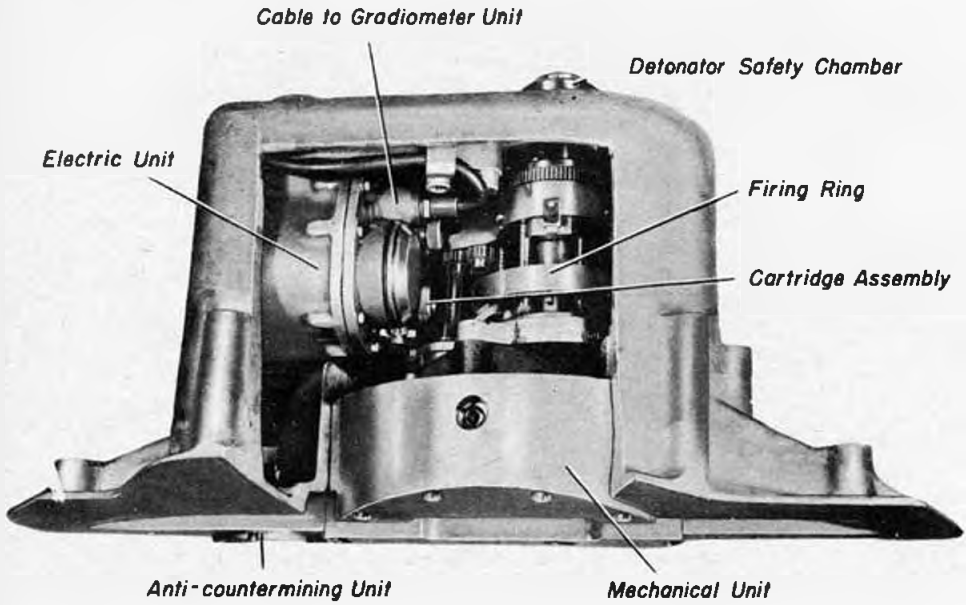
Mk 9 Exploder in Warhead Pocket, Cutaway View
